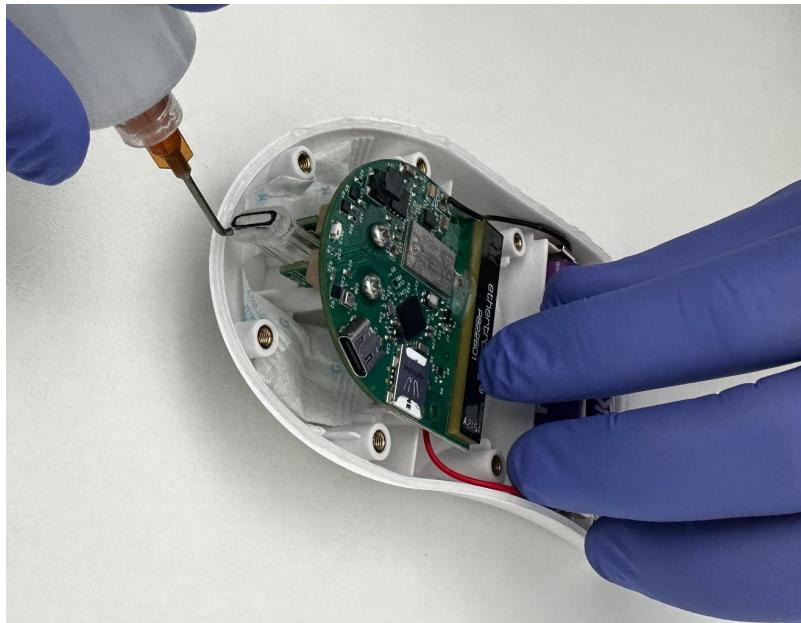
Dispensing adhesive over cuvette outlet o-ring
